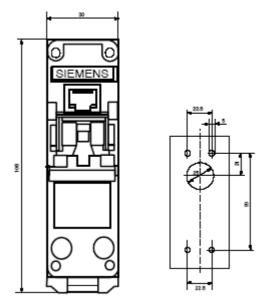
IE FC Outlet RJ-45 (dimensions in mm)
